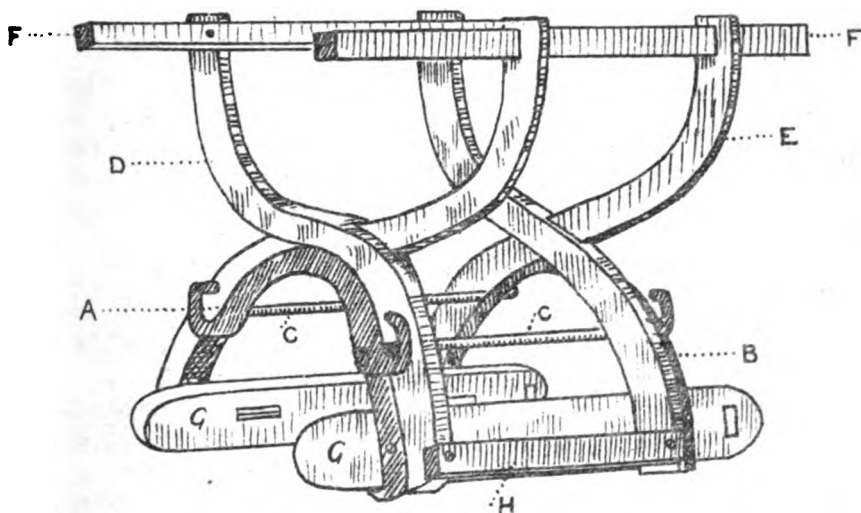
Top load saddle and cradle, stripped to show the method of attachment of the wooden cradle.
